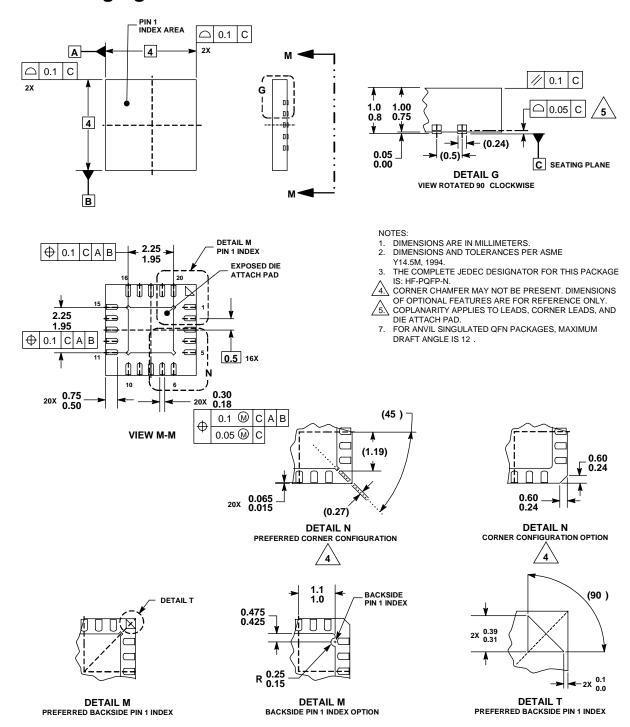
Outline Dimensions for QFN-20 (Case 1308-02, Issue C)
